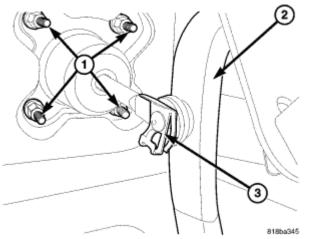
Identifying Retainer Clip, Pedal & Booster Mounting Nuts Courtesy of CHRYSLER LLC
